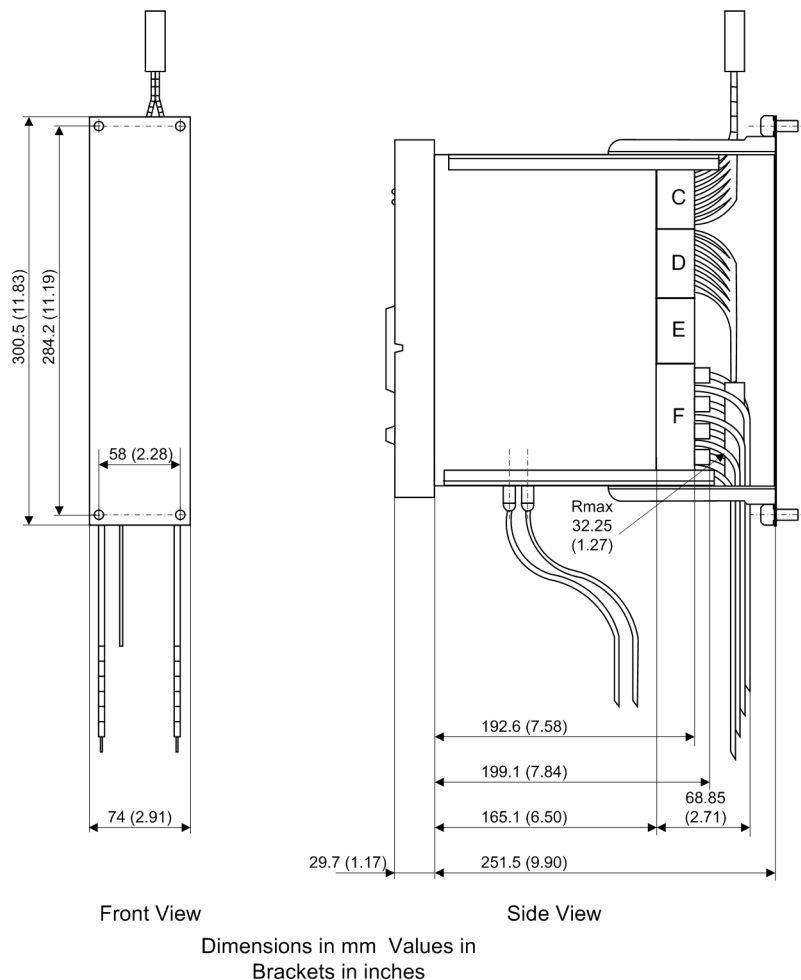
Dimensional drawing of a 7SJ80 for panel surface mounting (housing size  $\frac{1}{6}$ )
